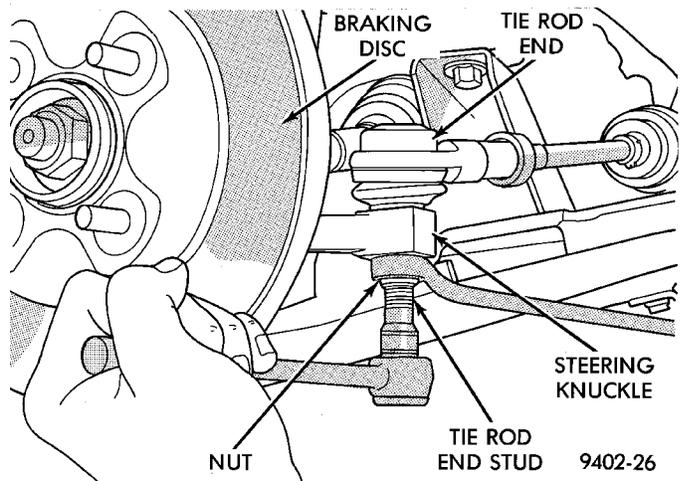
Removing /Installing Tie Rod End Attaching Nut
